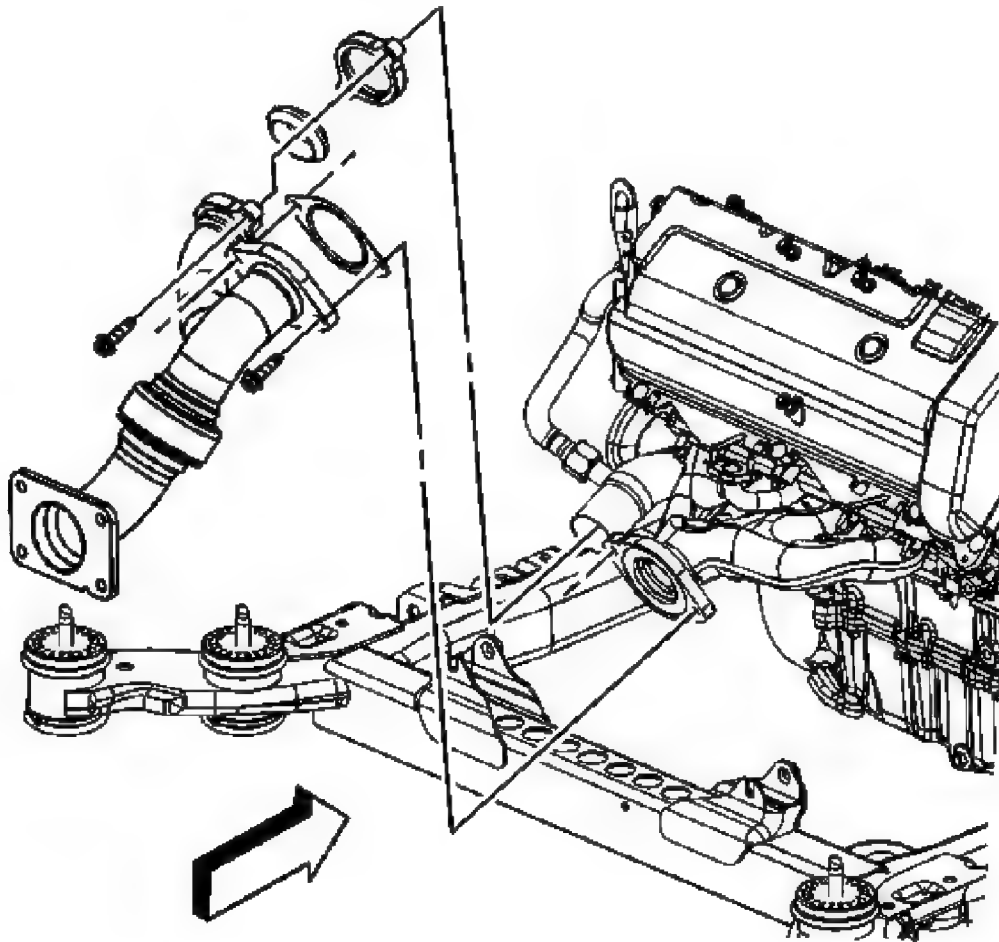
View Of Rear Exhaust Manifold Pipe & Attachments
